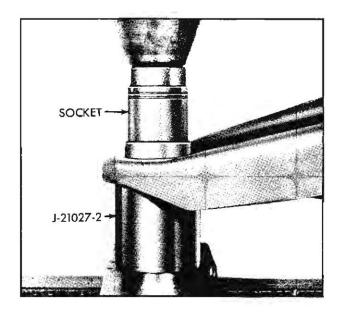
Pressing Ball Joint from Lower Control Arm
